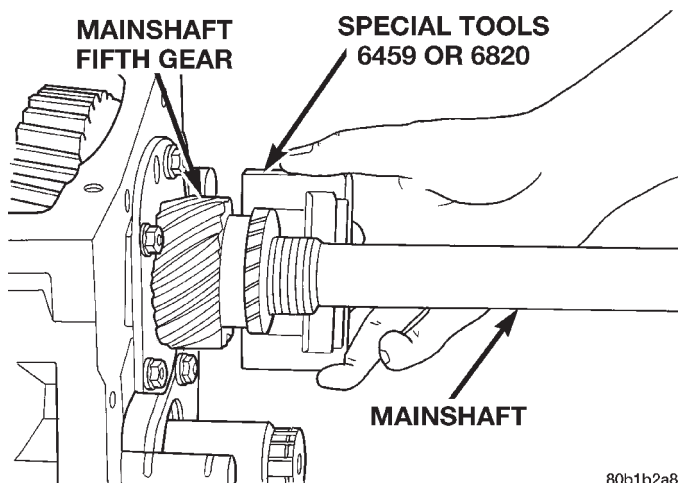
Installing First Puller Jaw On Mainshaft Fifth (Overdrive) Gear
